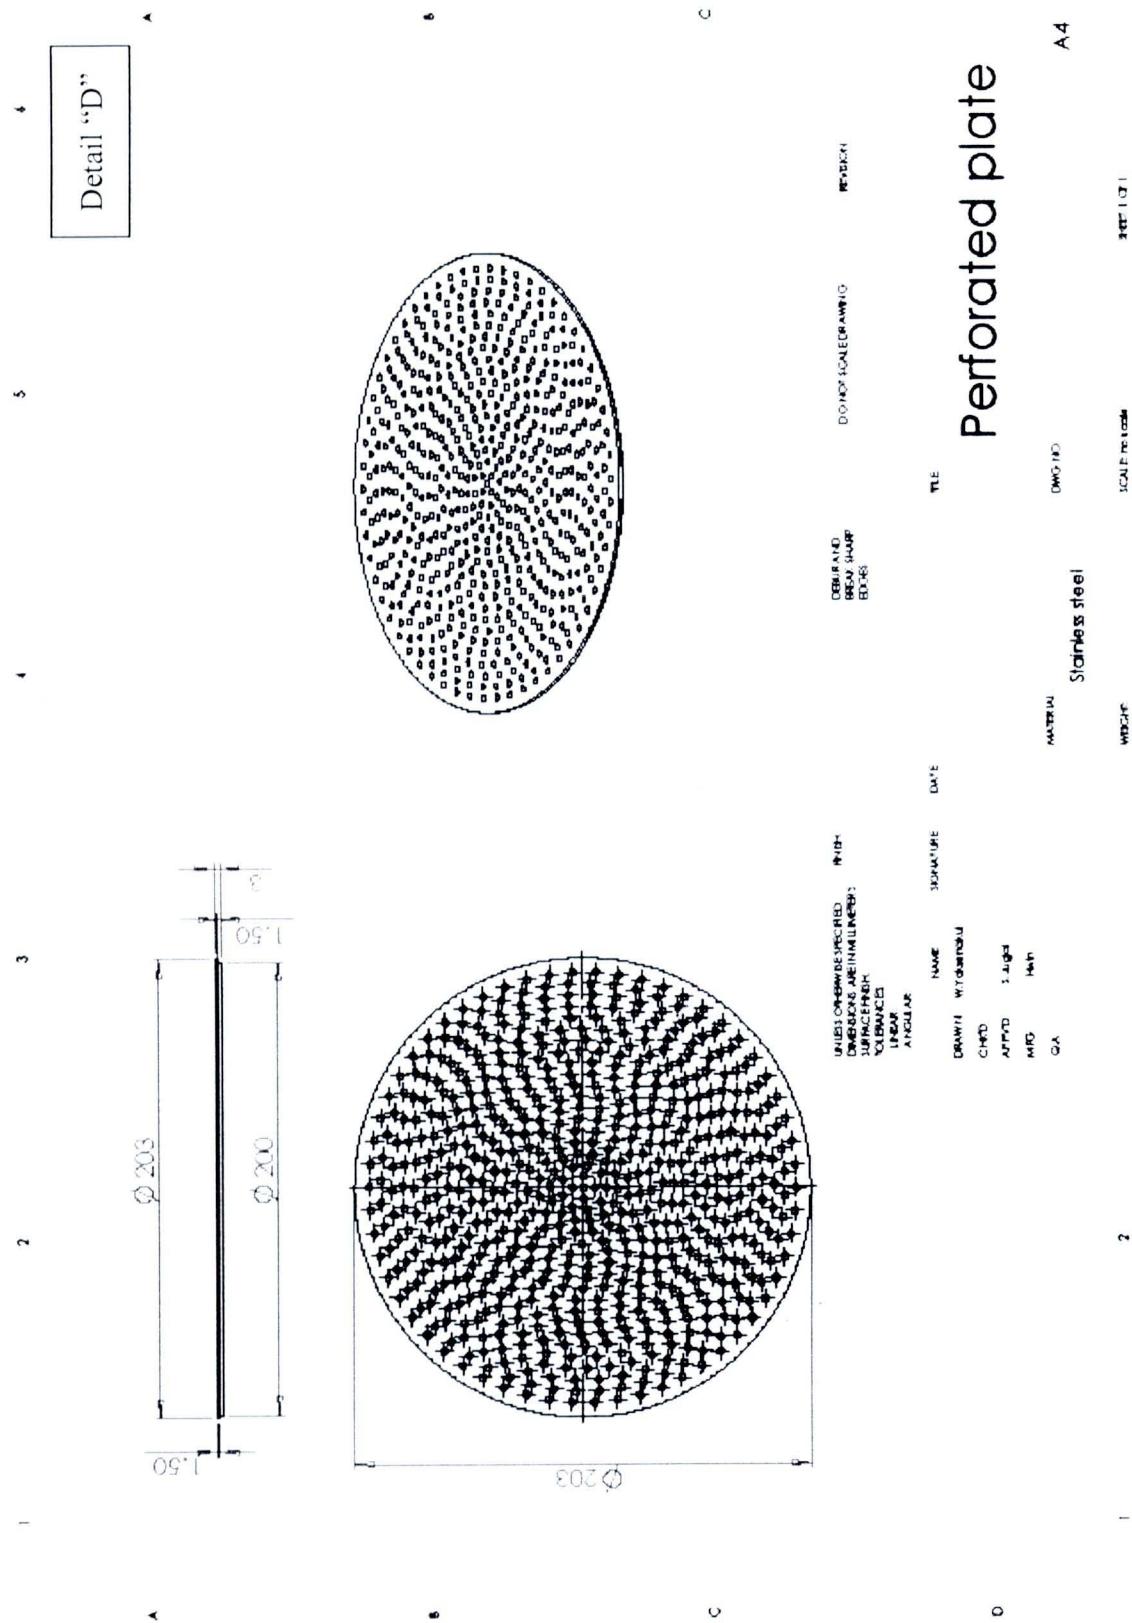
Drawing of perforated stainless steel plate (SPMB).
